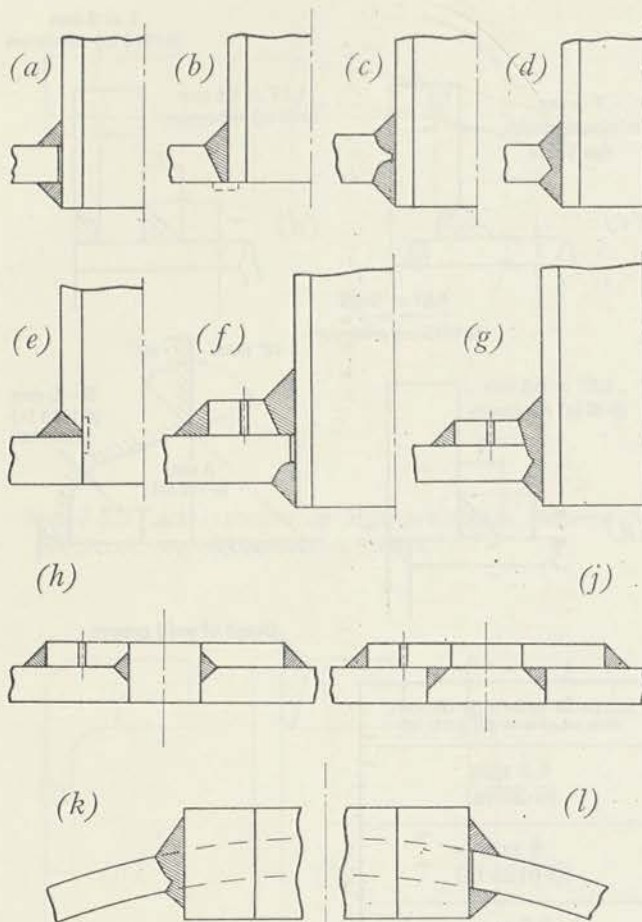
TYPICAL ACCEPTABLE METHODS OF ATTACHING BRANCHES AND PADS
